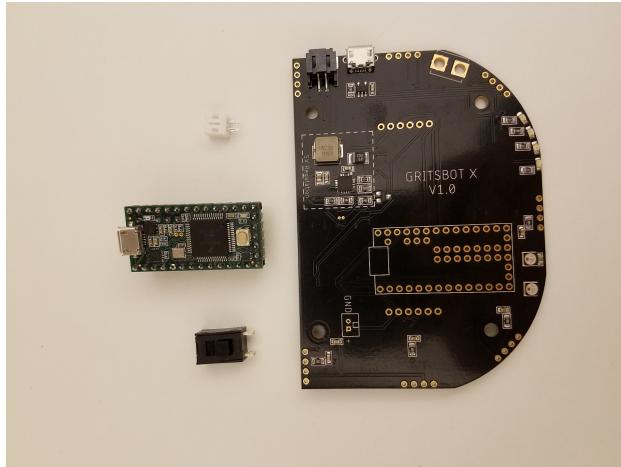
The materials for the first solder pass of the main PCB of the GRITSBot X.
